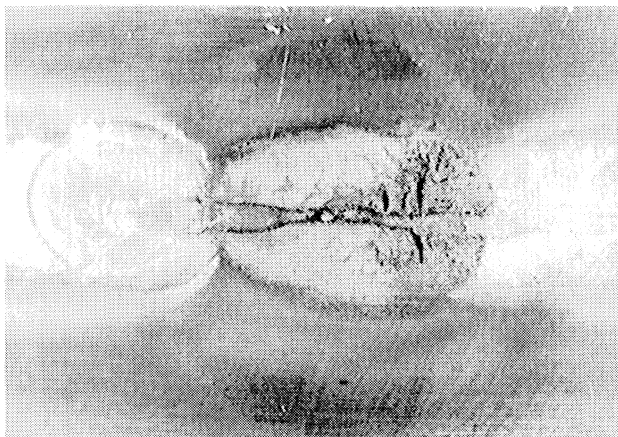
Weld cut-out showing root side of a circumferential pipe weld.
